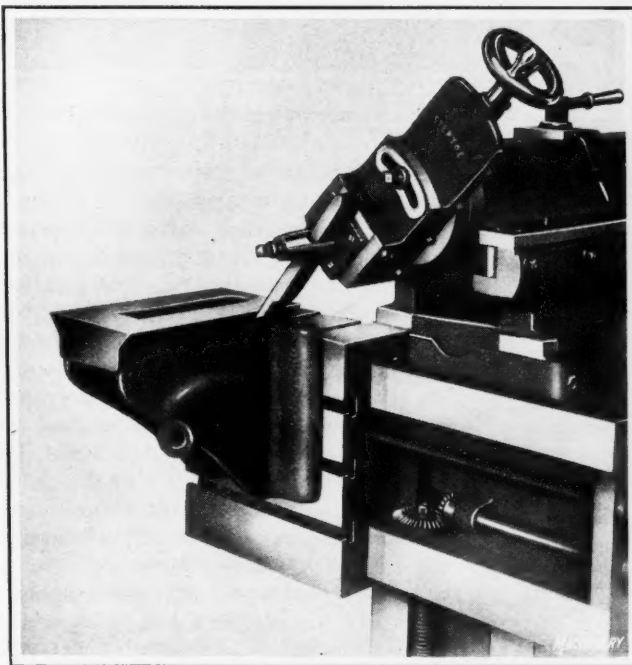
Use of Shaper for planing the Dovetailed Saddle Bearing of a Hand Milling Machine Knee
